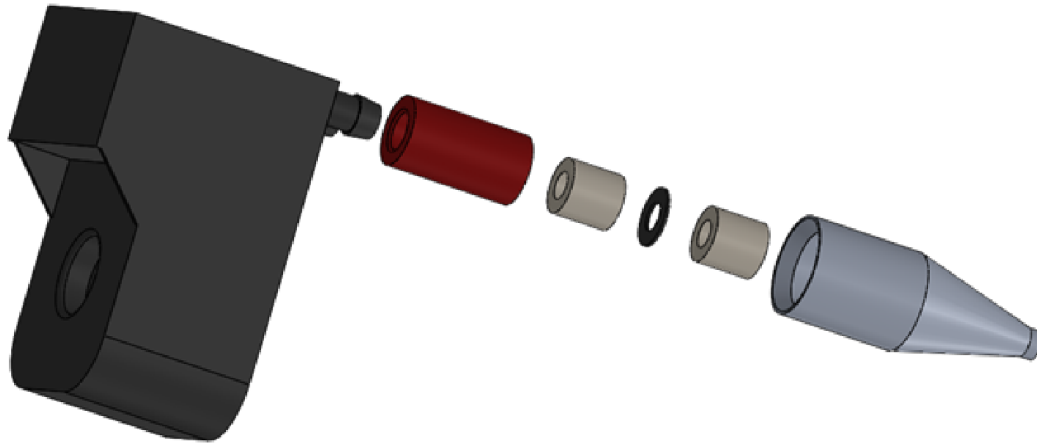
Renderings showing vacuum pump to tool shaft interface.
